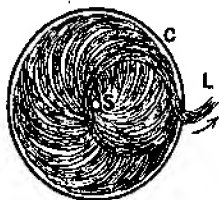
PLAN VIEW OF SLIVER COILED IN A CAN.
